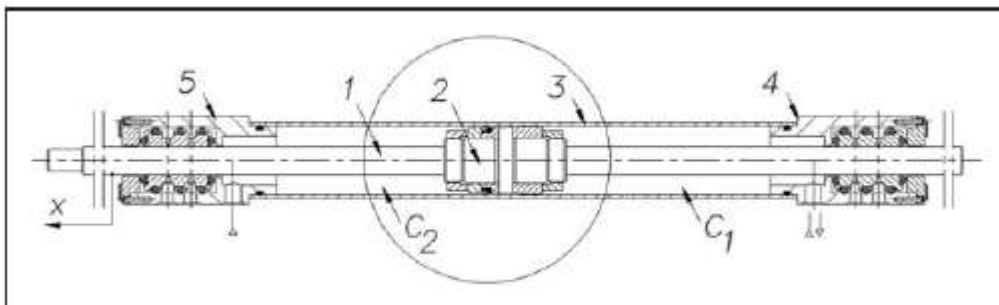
Schematic view of system layout 2, piston seal friction measurements
